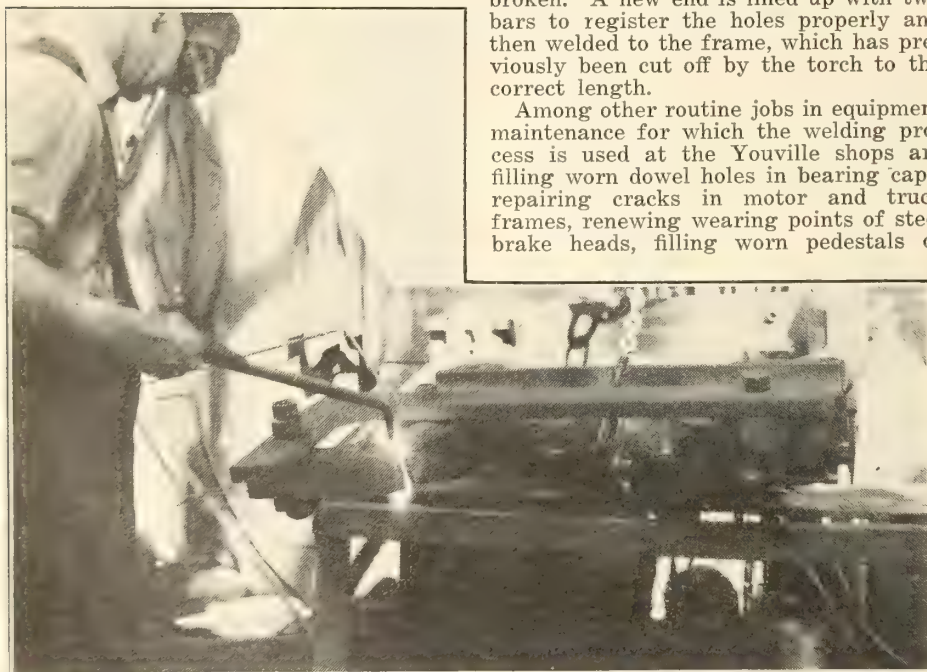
Welding New Gear Case Lug on Motor.
